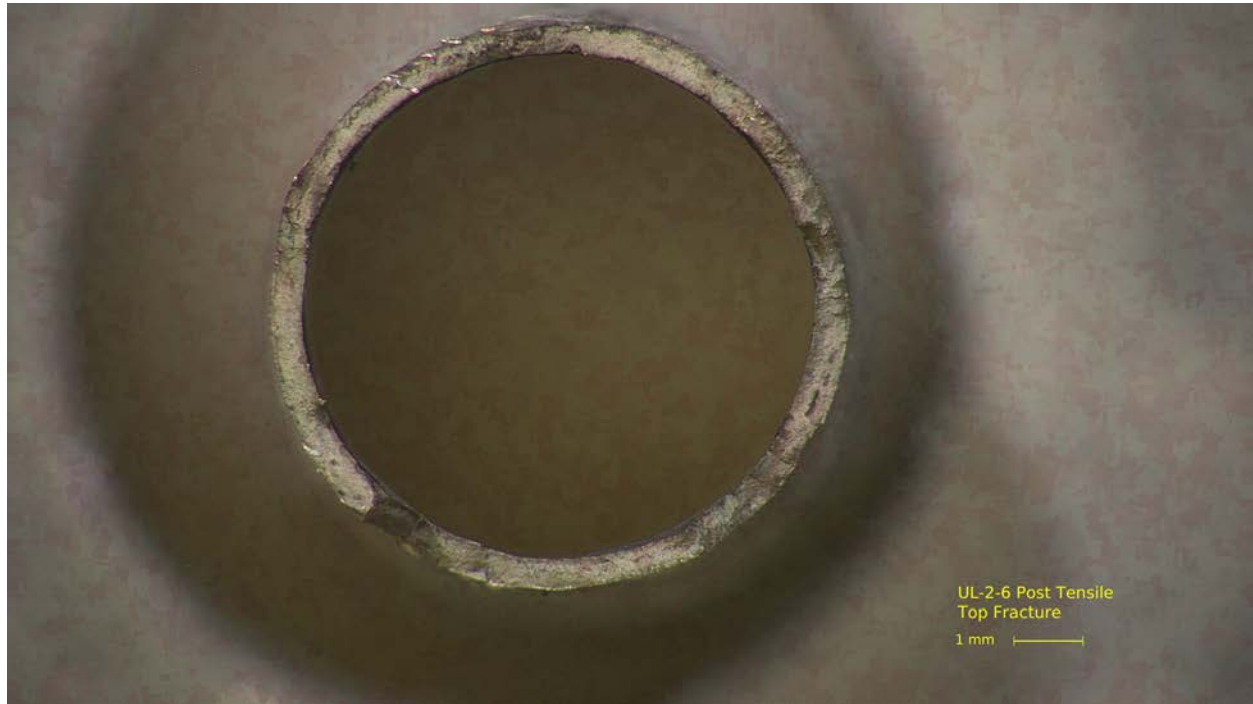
Post-Tensile Image Top Fracture for UL-2-6
